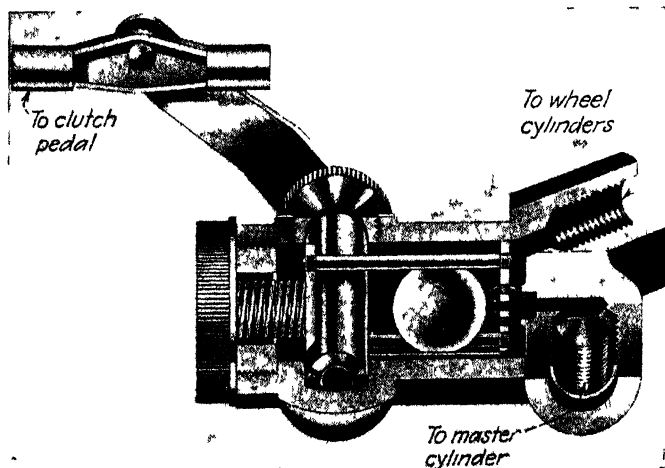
SECTIONAL VIEW OF HILL-HOLDER
